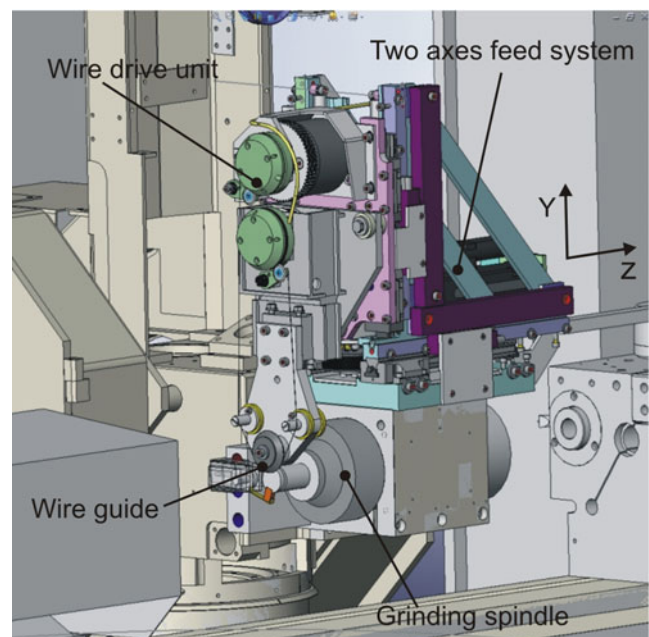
Wire drive unit and feed system of wire electrical discharge dressing unit
